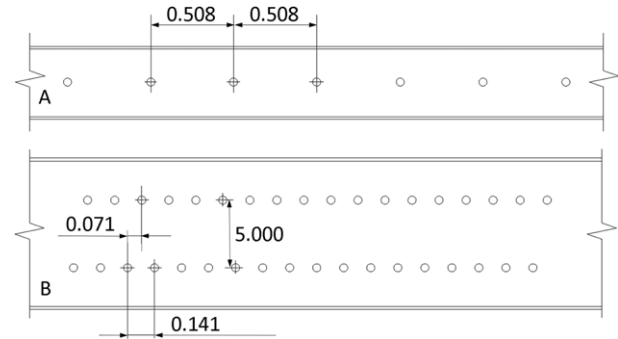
Schematic view of the printheads, with dimensions in millimeters. (a) Single-row printhead, (b) double-row printhead. The drawing is not to scale.
